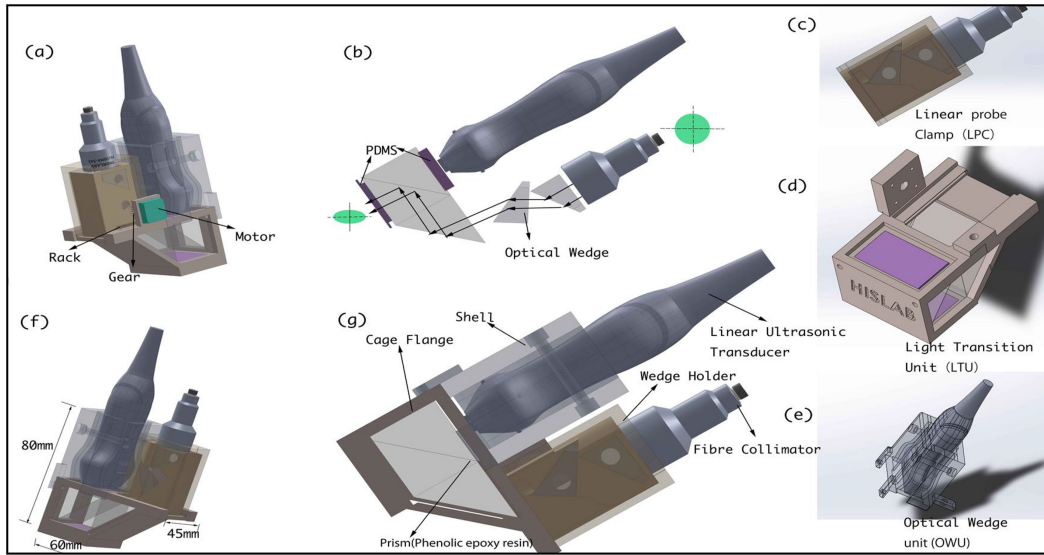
CAD (Computer Aided Design) photograph of the designed handheld probe for PA imaging. (a), (f) Axonometric of probe; (b) Schematic of beam shaping; (c) Linear Probe Clamp (LPC); (d) Light Transition Unit (LTU); (e) Optical Wedge Unit (OWU); (g) Front view of probe.
